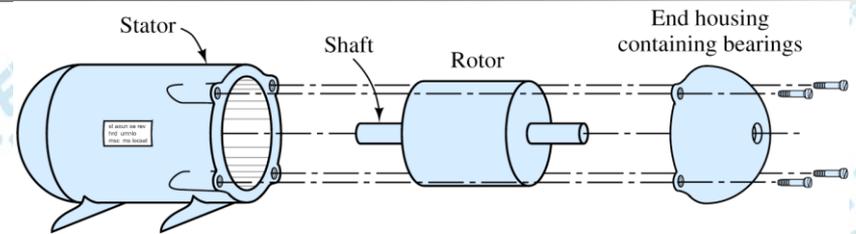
An electrical motor consists of a cylindrical rotor that spins inside a stator.
